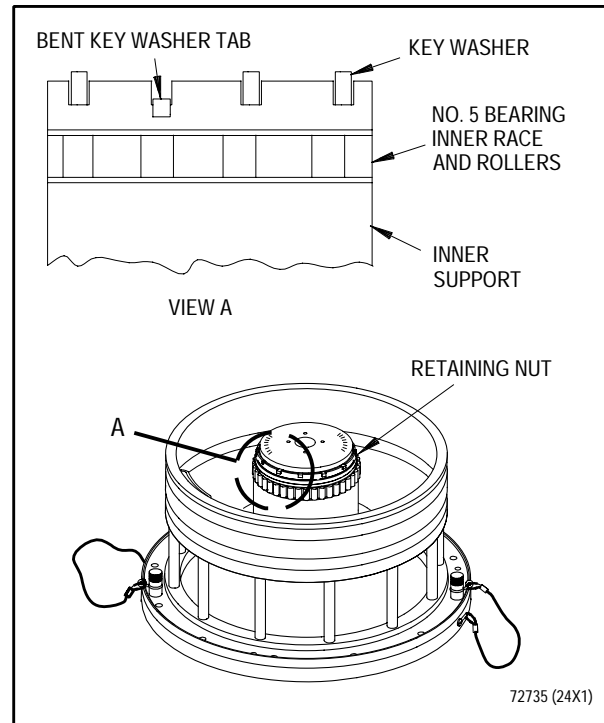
No. 5 Bearing Inner Support Assembly and No. 5 Bearing Inner Race and Rollers - Assembly (Sheet 6 of 6)
